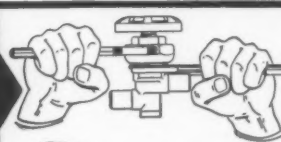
Shown wrenches properly applied to main body and auxiliary body for breaking the joint; the first step in disassembling the valve.
